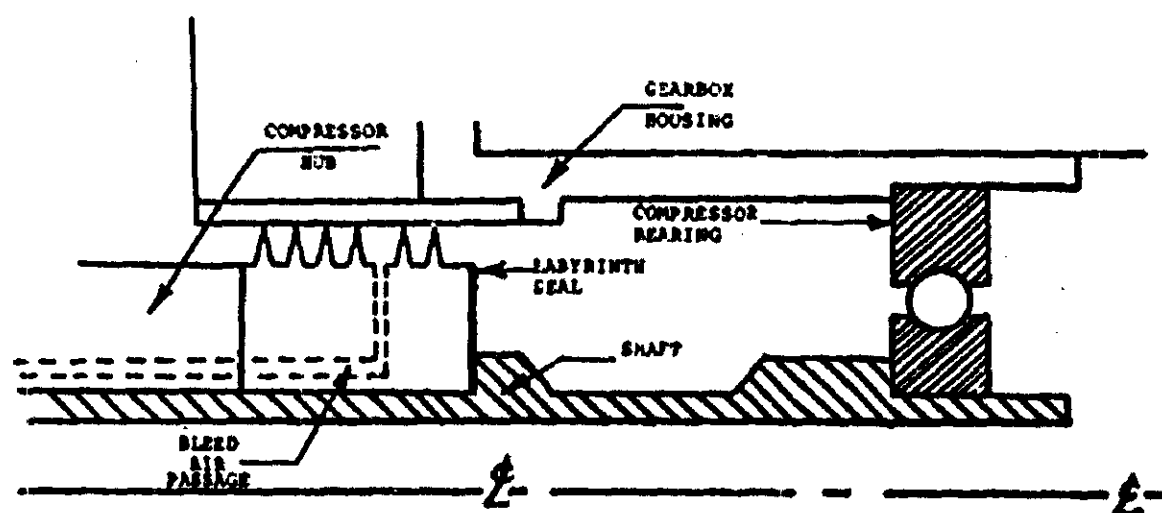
Pressurized rotating labyrinth seal mounted on the engine shaft with the compressor bearing.
